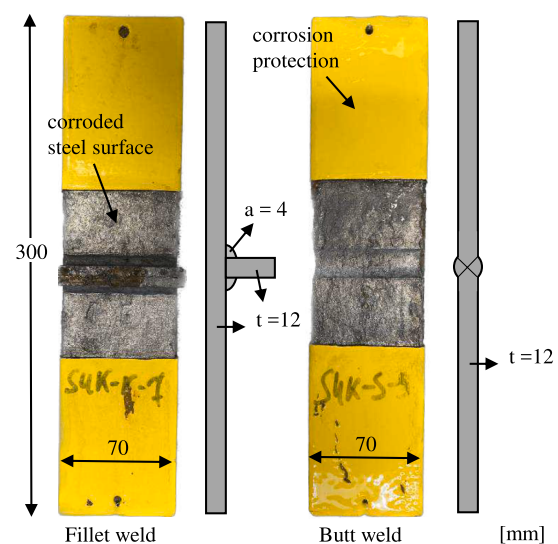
Specimen geometries and corroded surface after rust removal for fillet- and butt-welded specimens.
